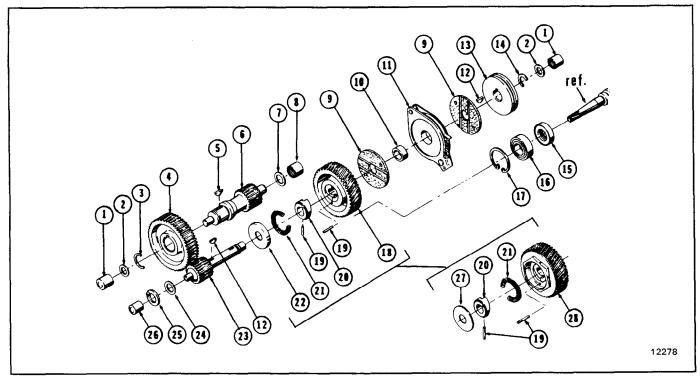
Gearing and Load Brake Parts (Including Overload Clutch).
